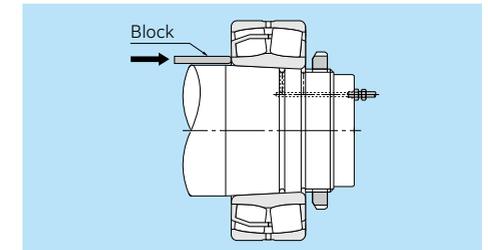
Disassembly of bearing with withdrawal sleeve
